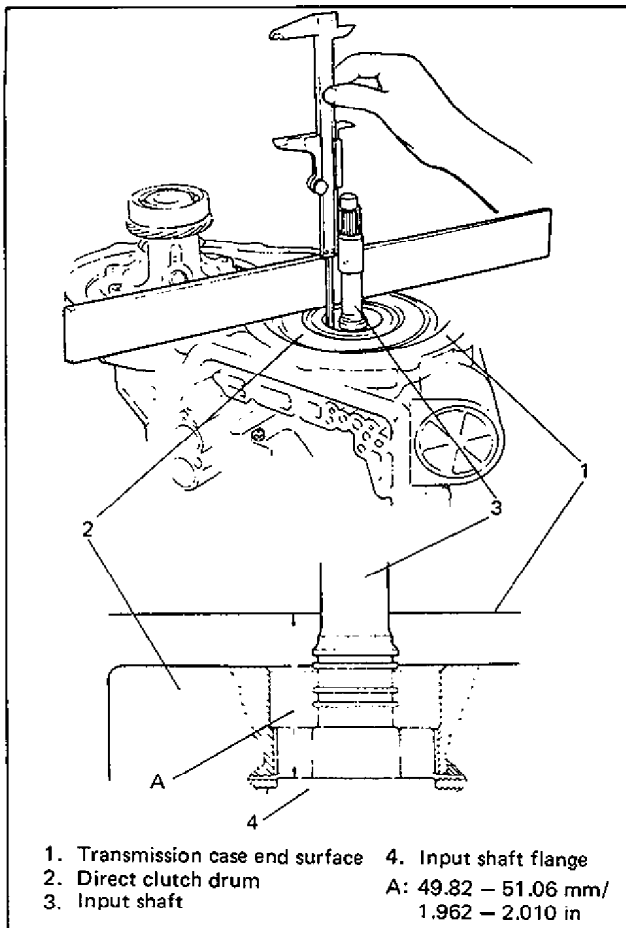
B-214 Measuring Distance Between Case End Surface and Input Shaft Flange
